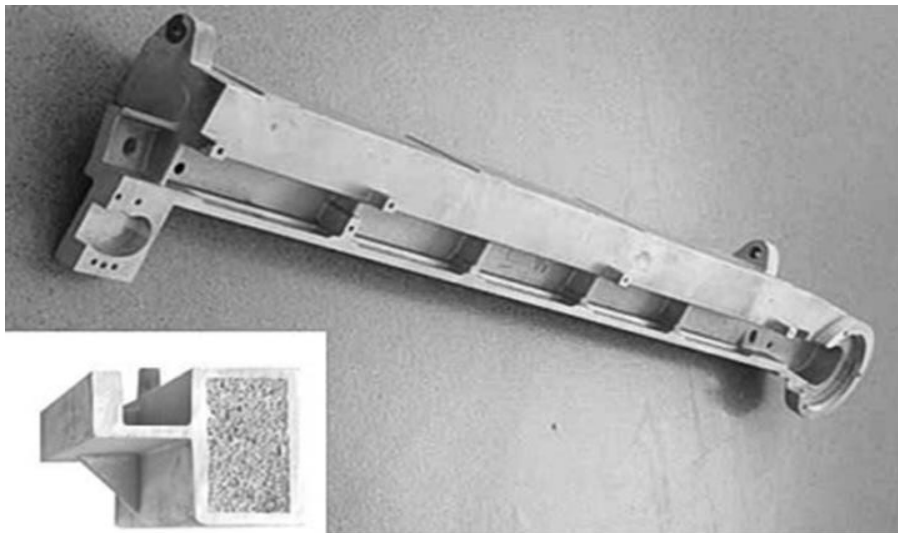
Sample of a part made with porous aluminium. The entire part length is 1900 mm; the foam core length is 1580 mm
